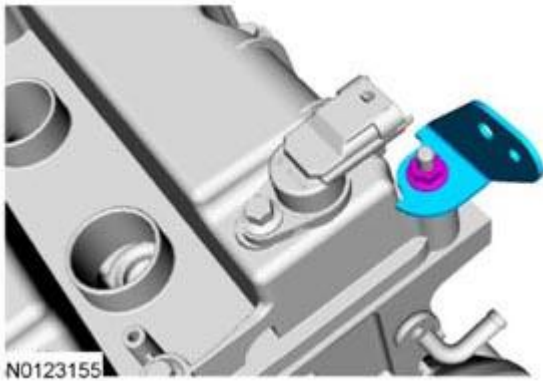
Identifying Heated Oxygen Sensor (HO2S) Electrical Connector Bracket And Nut
